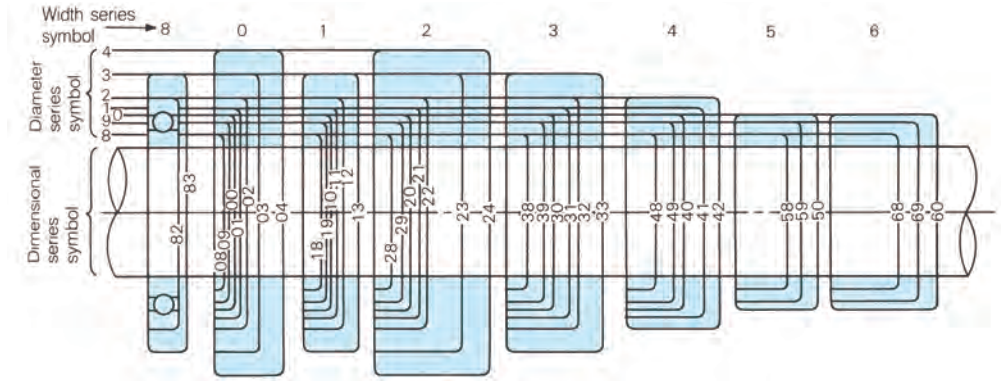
Cross-sectional profiles of radial bearings by dimensional series
